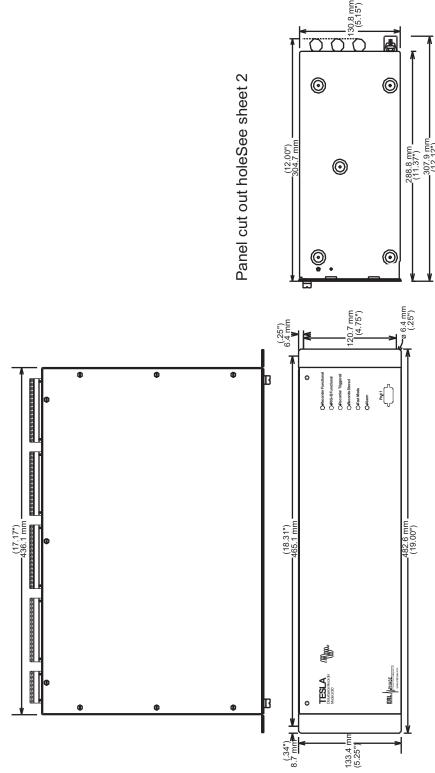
Mechanical Drawing (rack-mounted TESLA model 2000)
